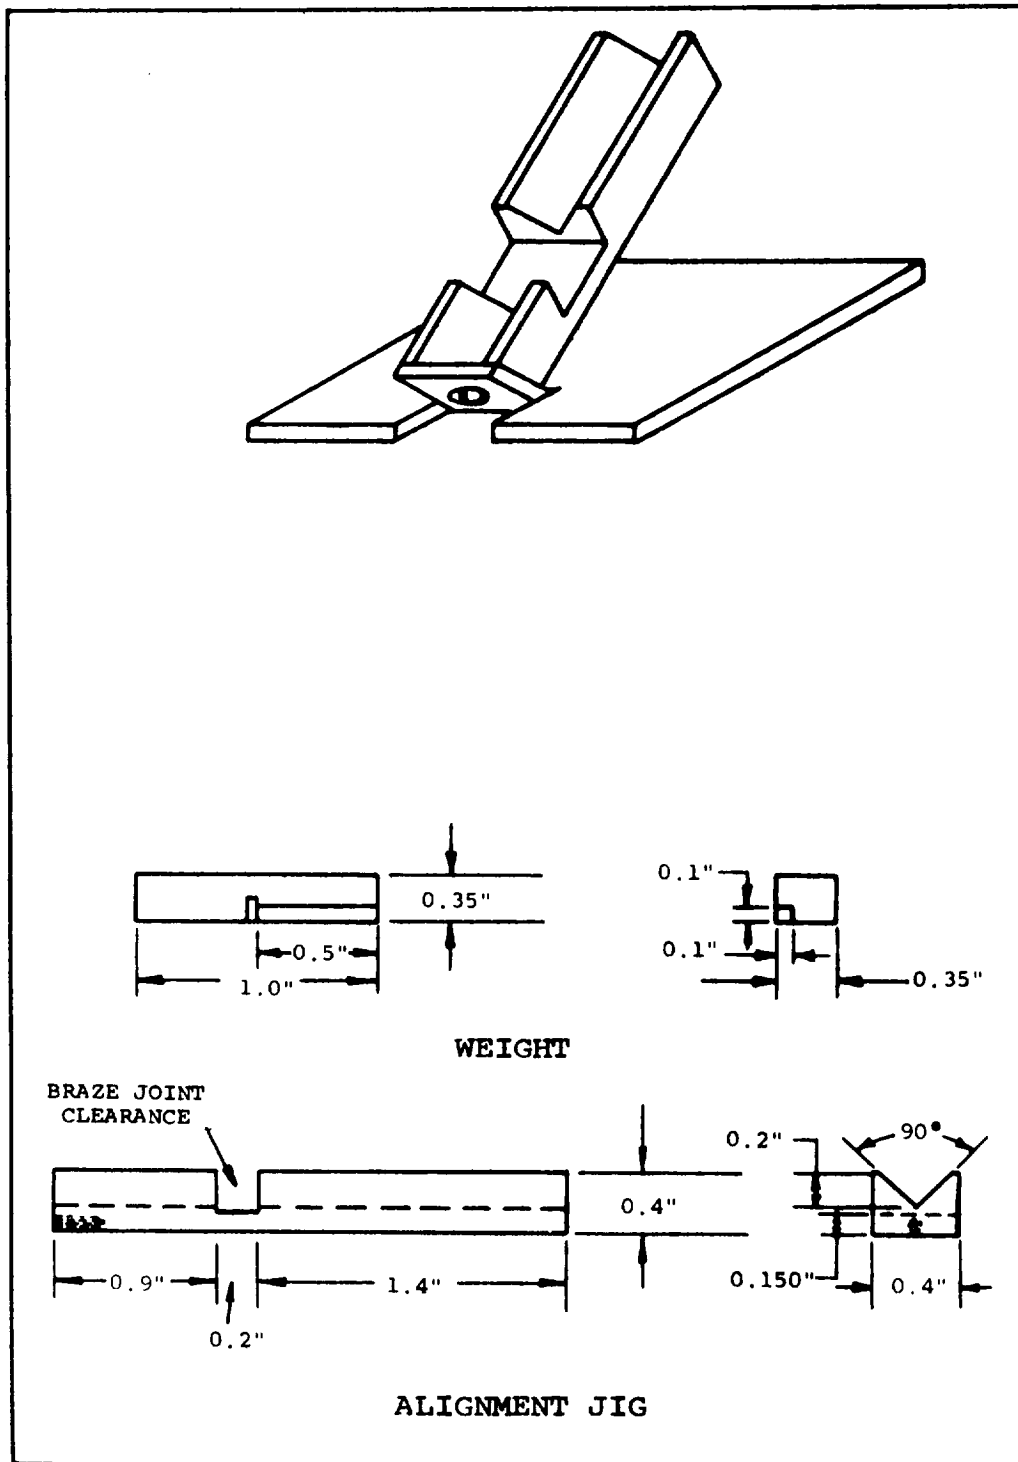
Modulus-of-Rupture Brazing Fixture
